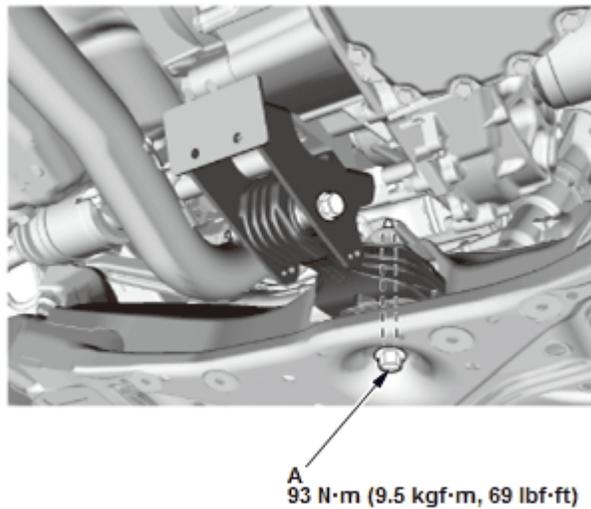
Torque Rod Mounting Bolt With Torque Specifications
